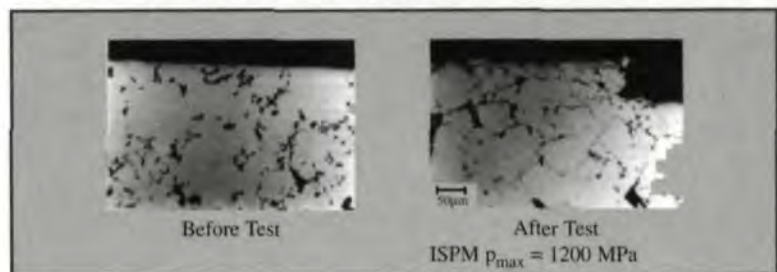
Transverse sections of test gear ISPM near tooth surface before and after test.
